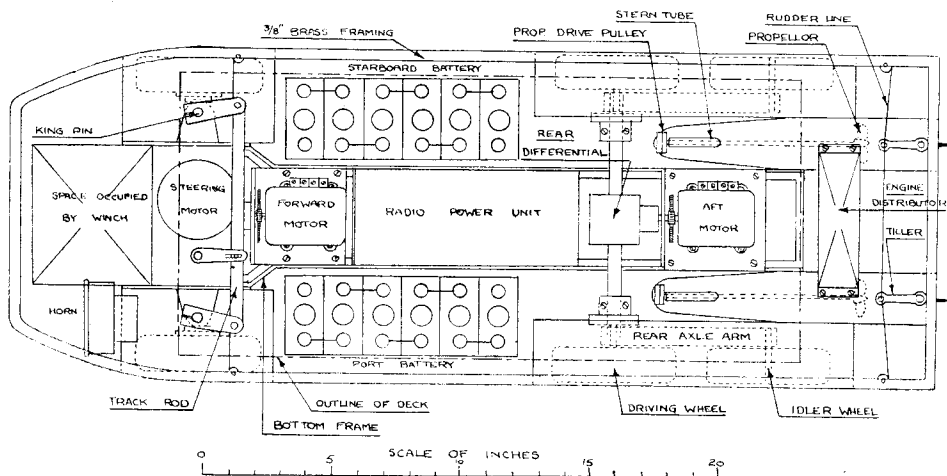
Plan, with deck, filter unit, R.F. unit and propeller motors removed
